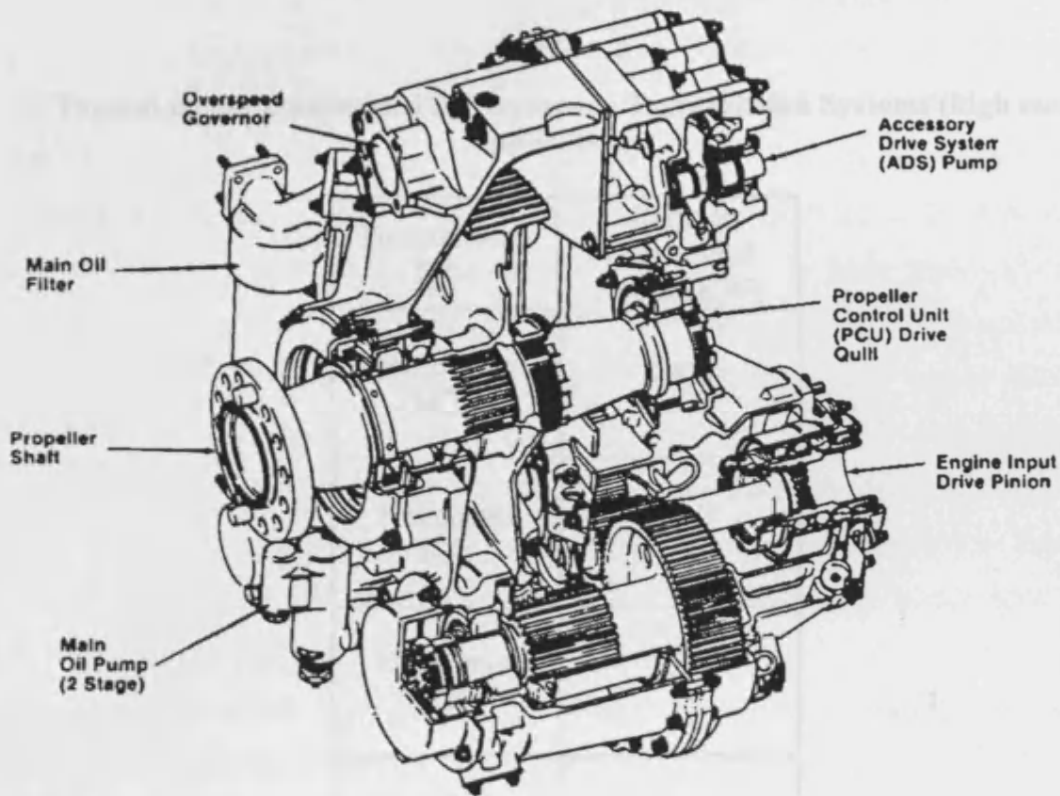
Cutaway drawing of a Turboprop reduction gearbox using twin-compound gear technology (from Pratt & Whitney)
